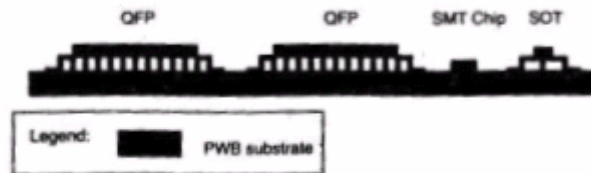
Type 1B assembly (single-sided pure SMT)
